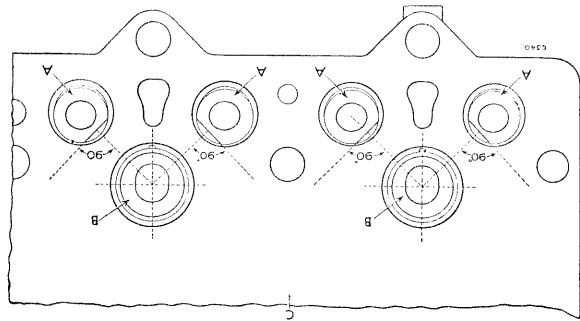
Correct position of push-rod tubes in relation to hot plugs
